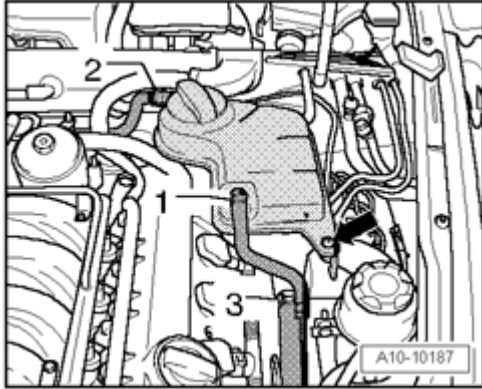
Removing Coolant Hoses & Coolant Expansion Tank
